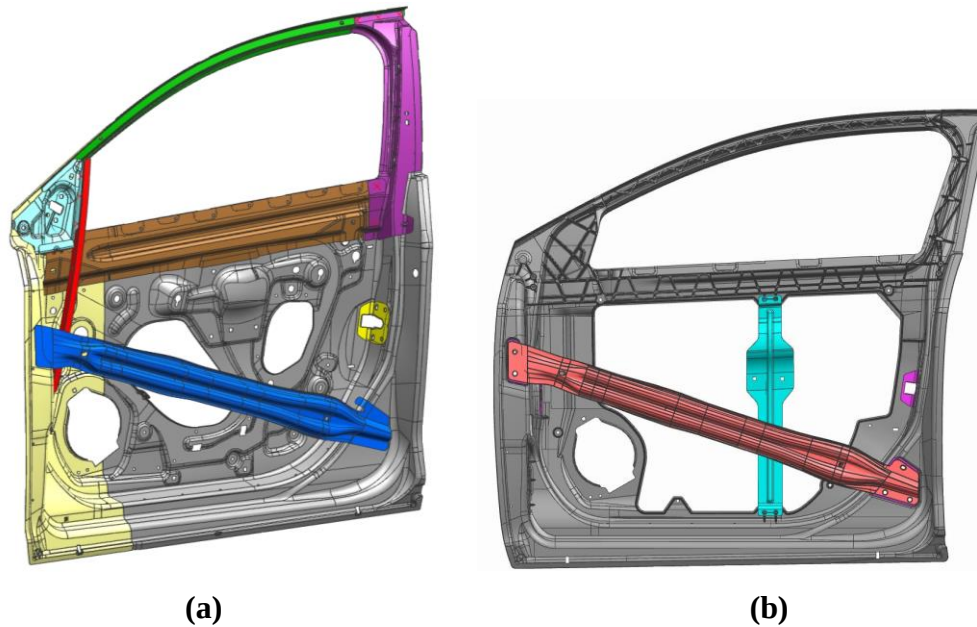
Major structural pieces of a (a) stamped steel welded door structure and a (b) die cast magnesium door design. Non-magnesium parts shown in (b) include the carry-over steel intrusion beam (orange), the aluminum pull-handle support (teal) and aluminum isolators (lavender). (The outer panels and outer beltline reinforcements are omitted from these figures for clarity. The stamped aluminum window regulator bracketry and forward glass run channel required on the magnesium door are omitted here also.) (Copyright 2015 by International Magnesium Association. Used with permission.)
